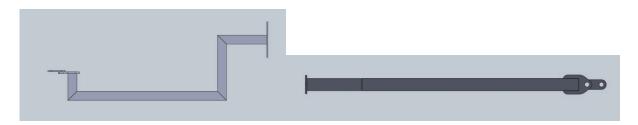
Welded Component of Mounting Top View and Mounting Side View
